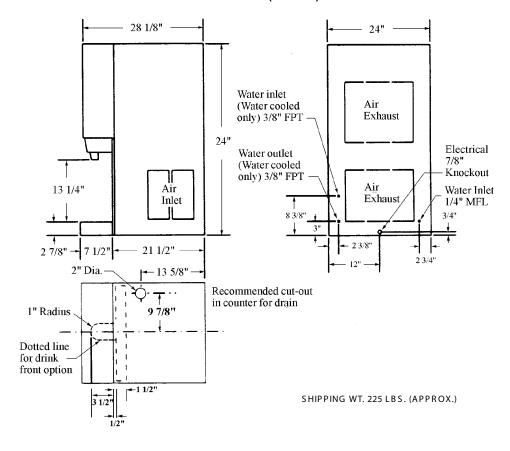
DIMENSION DRAWINGS (90 LBS.) IMD600-90
